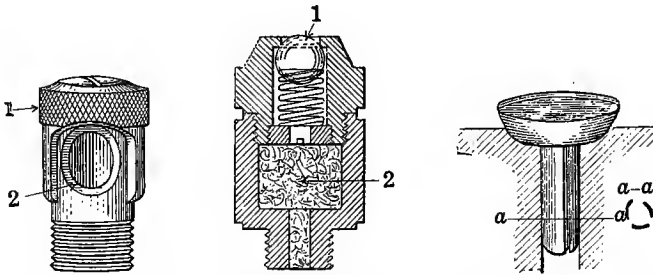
Oil hole cover. Fig. 118.—Ball valve and felt chamber. Fig. 119.—Oil hole protector.
